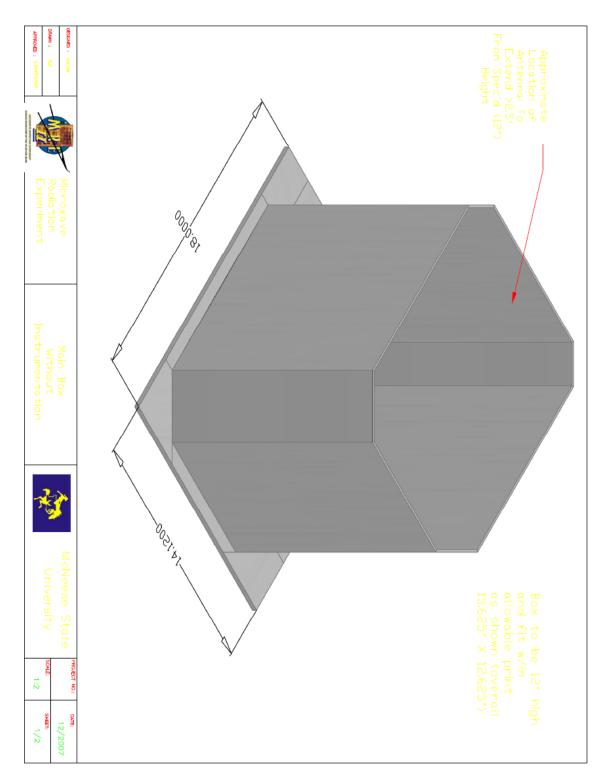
Overall schematic of the payload. The drawing shows the size of our box that will contain the electronics of our receiving apparatus, the thermal control system and data storage device. A feed horn antenna (not shown in this preliminary drawing) will protrude from the top of the box and oriented at an optimal angle to be pointed towards the sky. The box is made of insulating foam material.
